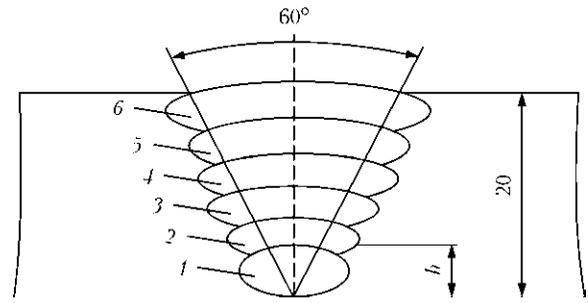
Schematic of layer-by-layer welding-up of butt joint by multipass arc welding: 1–6 – number of passes
